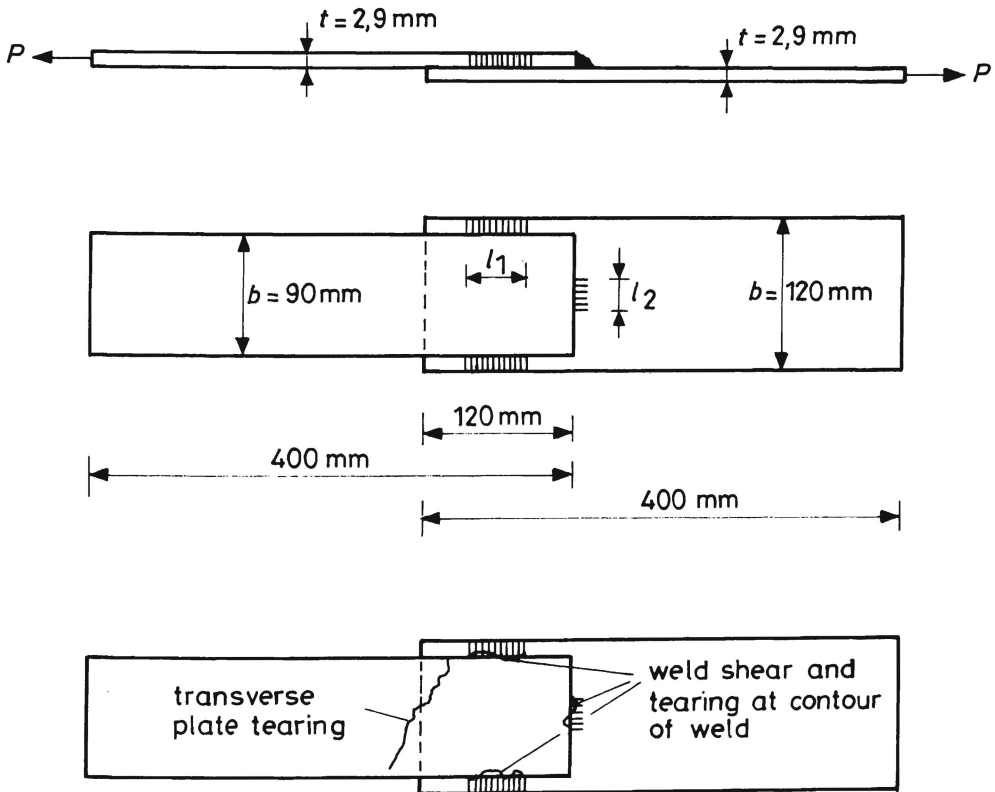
Single lap joint, longitudinally and transversely welded
